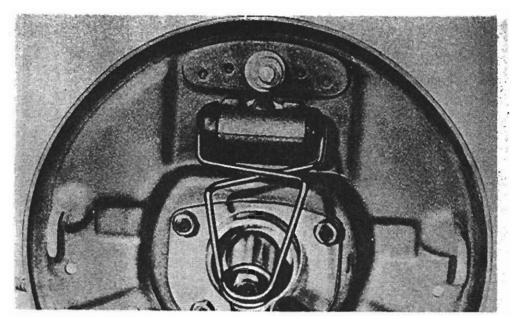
Use Brake Cylinder Clamps KMO-145 to Prevent the Pistons from Being Forced Out of Their Cylinders.
